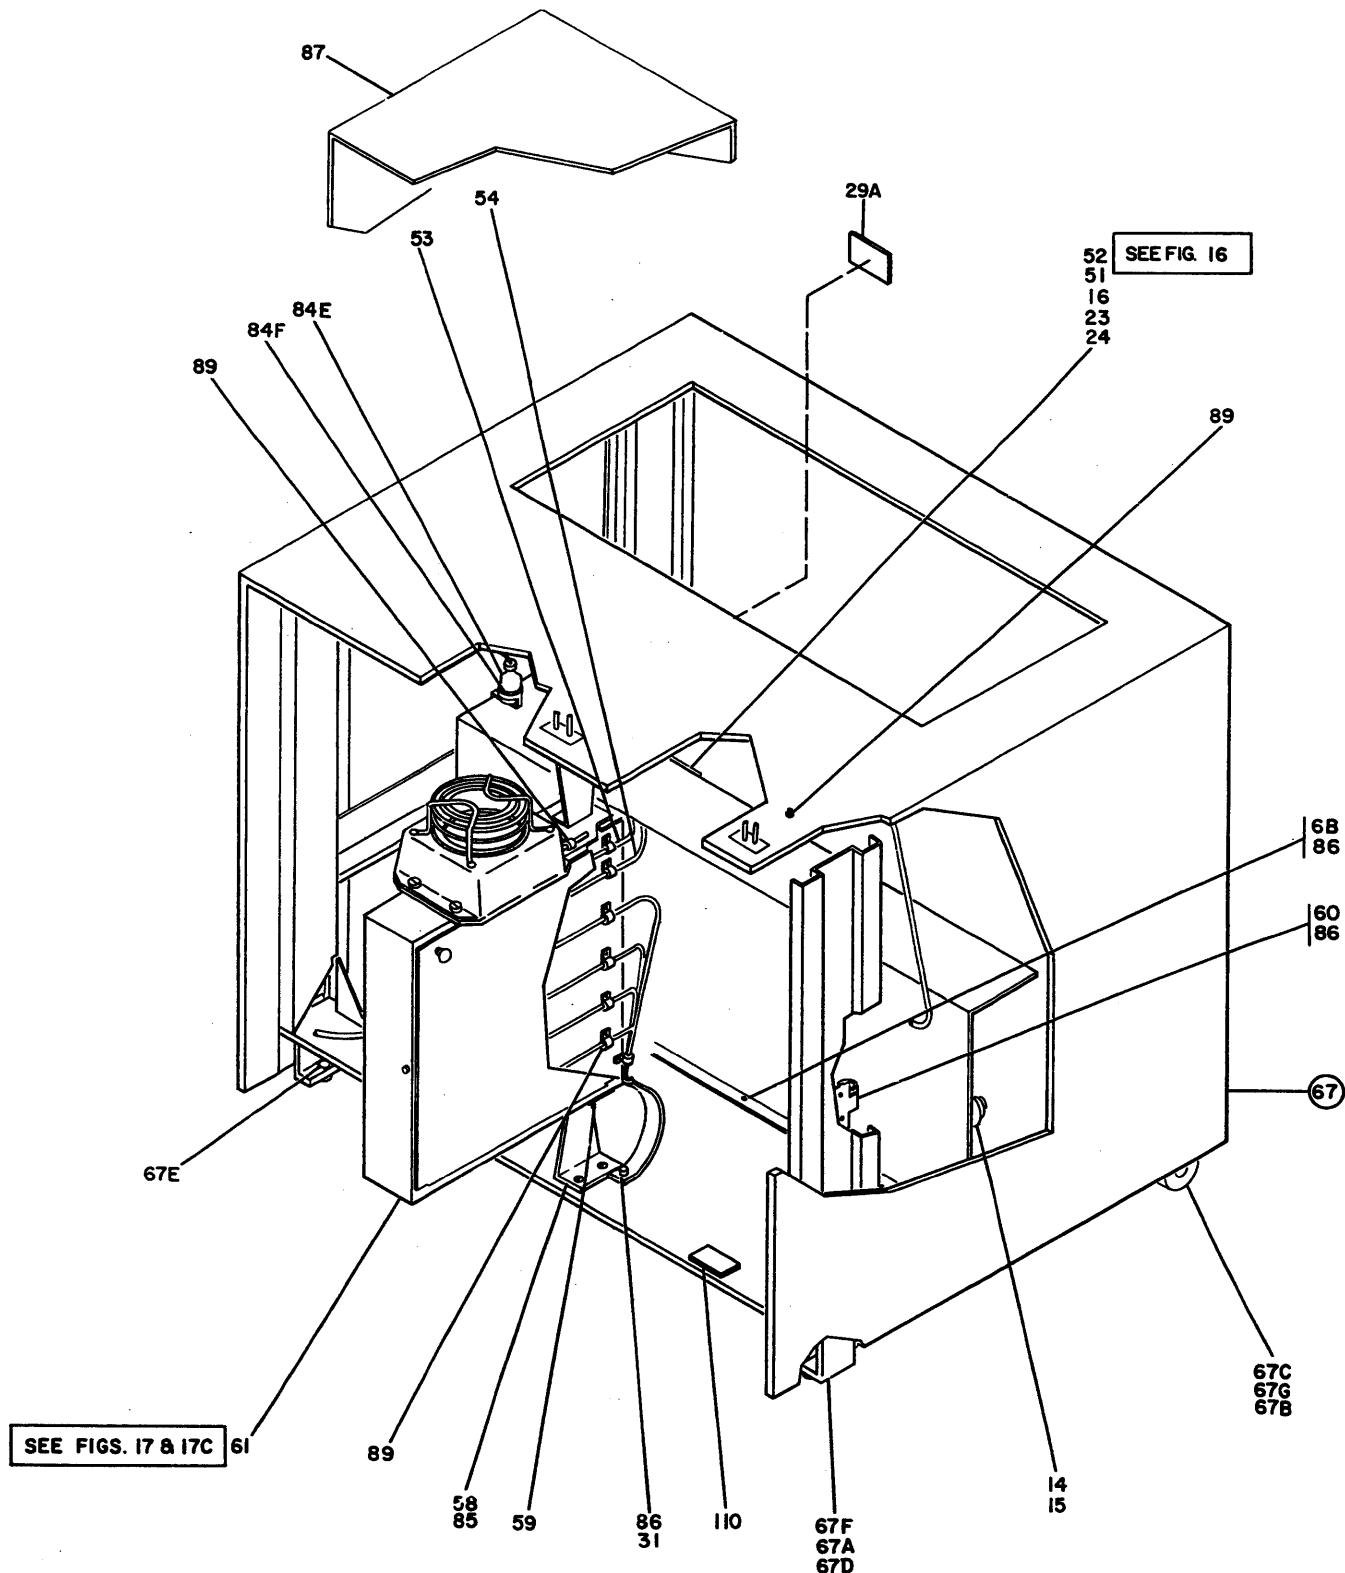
2311 DISK STORAGE DRIVE FINAL ASSEMBLY. SHEET 2 OF 2. SEE LIST 1.
